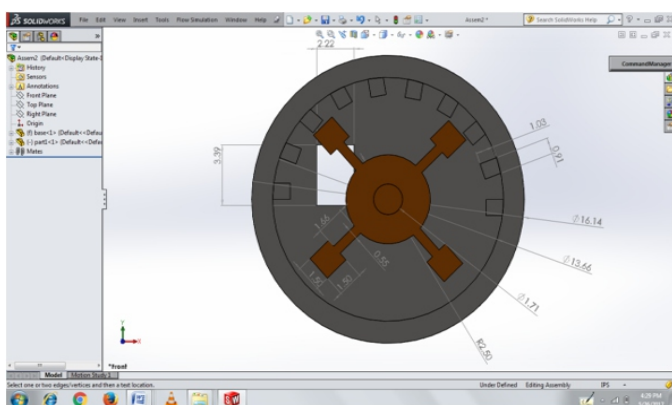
Modelling of Grinding Chamber with fixed teeth, rotor shaft, Rotor disc, Hammer Head and Hammer Arm assembly
